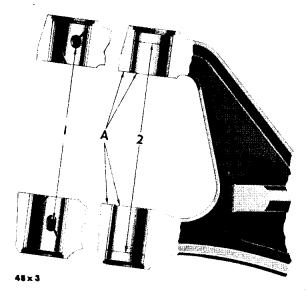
King Pin Bushings Installed (Elliott Type Axle) (B-4-F, B-4-G)
